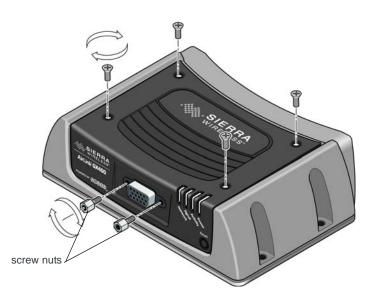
Replacing the screws and nuts (I/O X-Card installed)
